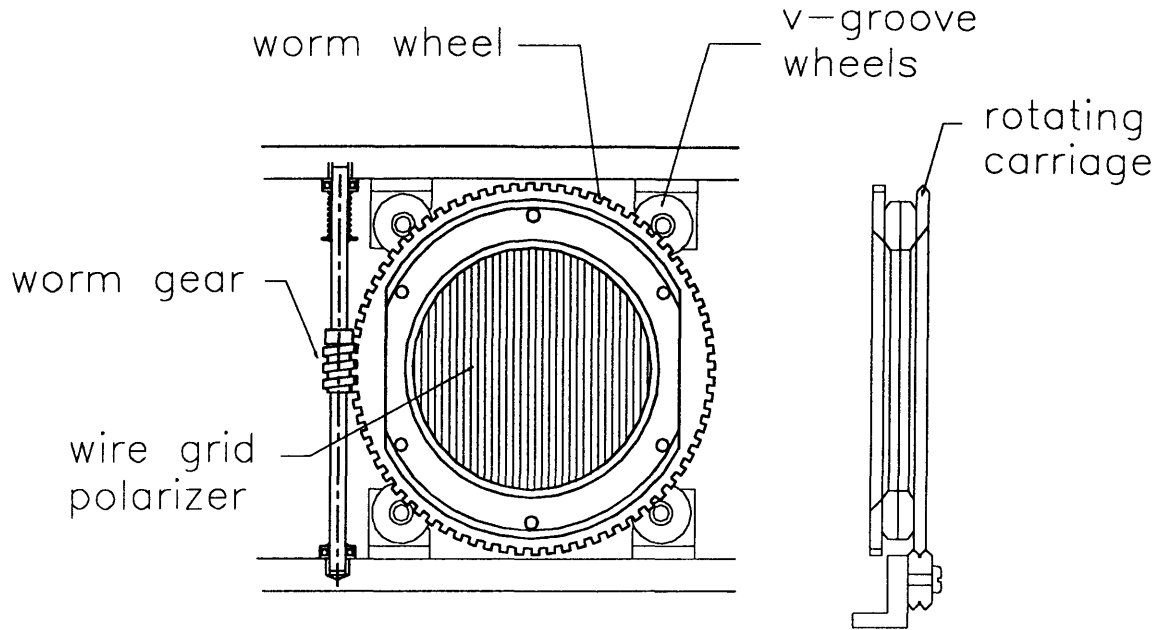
The drive and support mechanism for the rotating polarizers.
